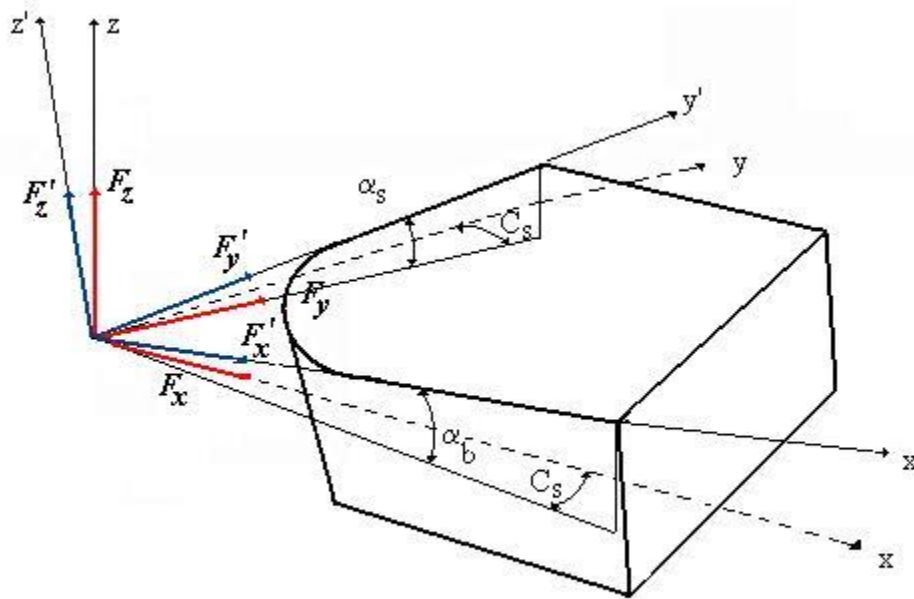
Schematic showing force measurement axis, forces acting on the tool, and tool geometry
